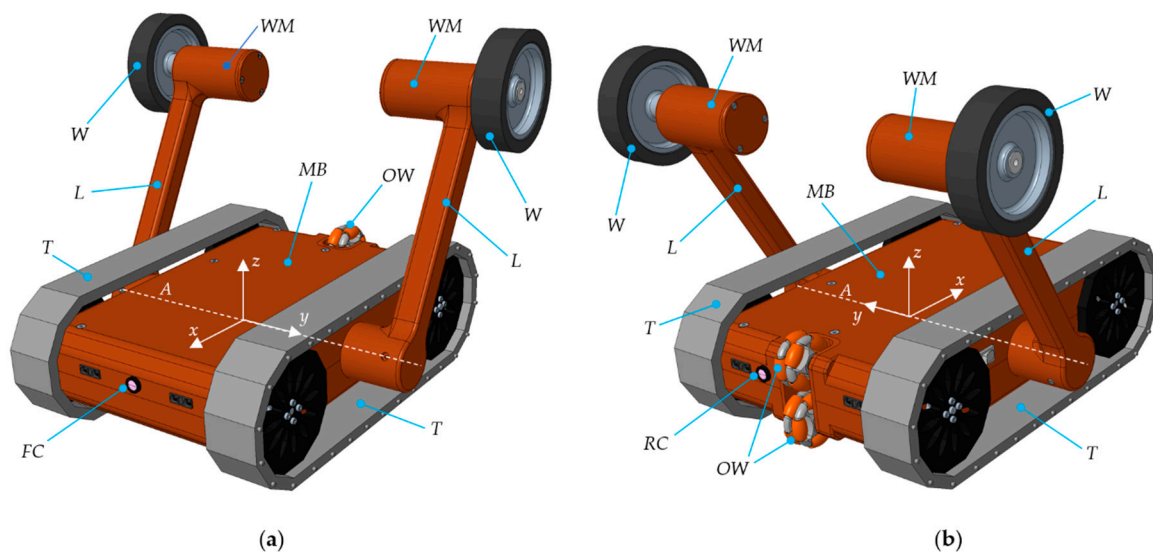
Conceptual design of the hybrid leg-wheel-track robot Wheel-Track-Leg Hybrid Locomotion (WheTLHLoc): (a) Front view; (b) rear view (*W*: Wheel; *L*: Leg; *T*: Track; *MB*: Main body; *WM*: Wheel gearmotor; *OW*: Omni wheel; *FC*: Front camera; *RC*: Rear camera; *A*: Leg axis).
